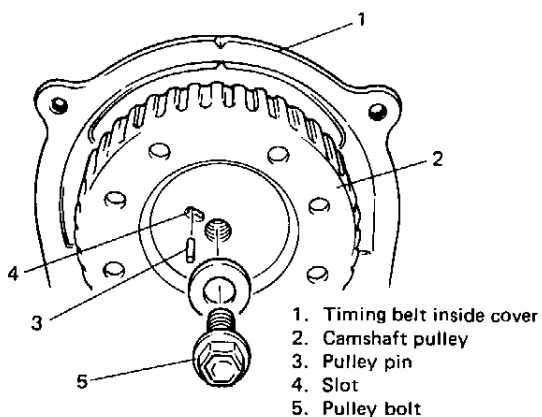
Pulley Pin, Slot and Pulley Bolt
